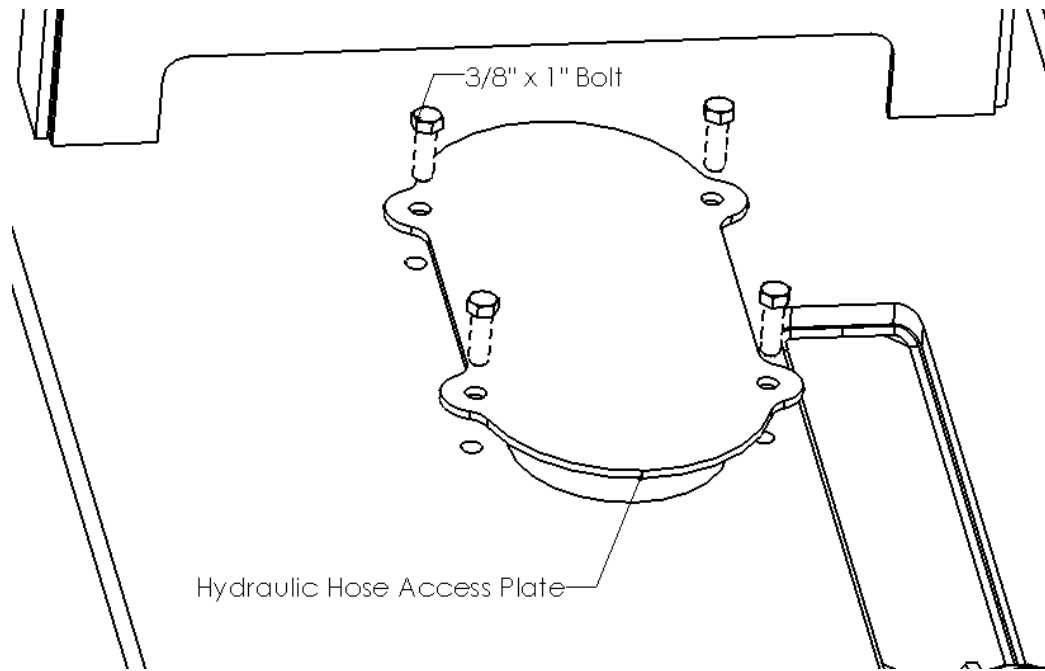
Hydraulic Hose Access Plate Attachment
